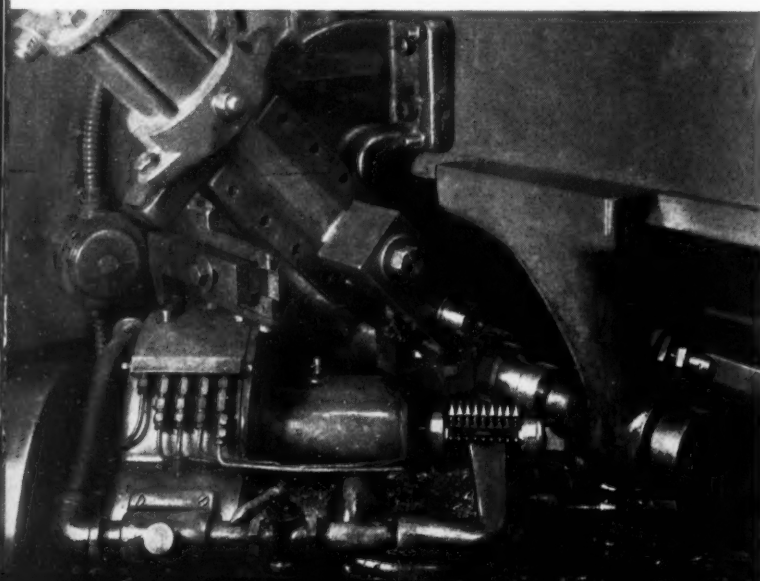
An Automatic Burring Attachment for the Packard 120 Transmission Gears Applied to a Barber - Colman Gear - hobbing Machine
